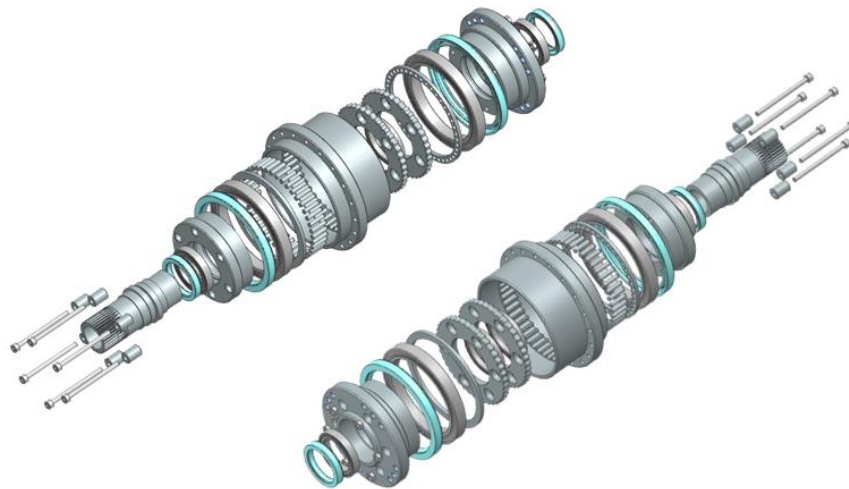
Exploded view – Hollow shaft cycloidal shaft
